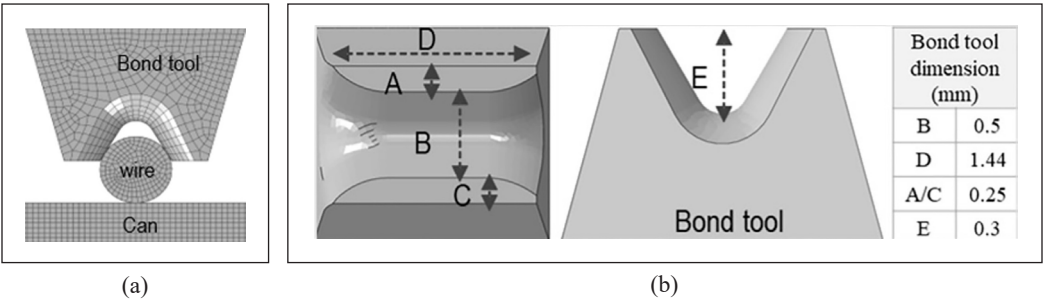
(a) Geometric model of bonding component; (b) Bond tool shape and key size
